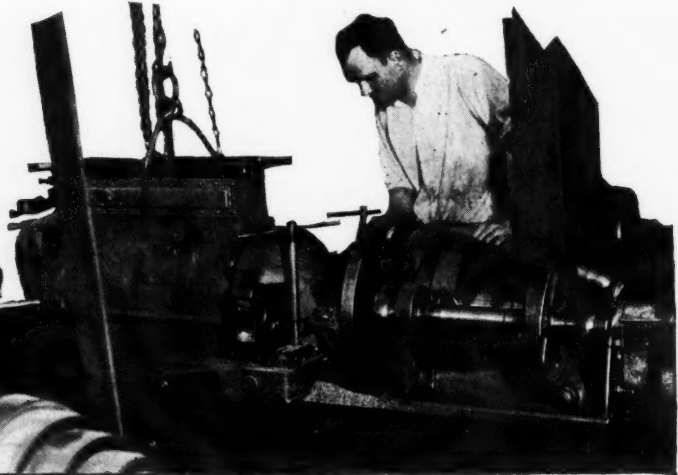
An indexing fixture holding two flywheel housing castings is used at the Paige plant
